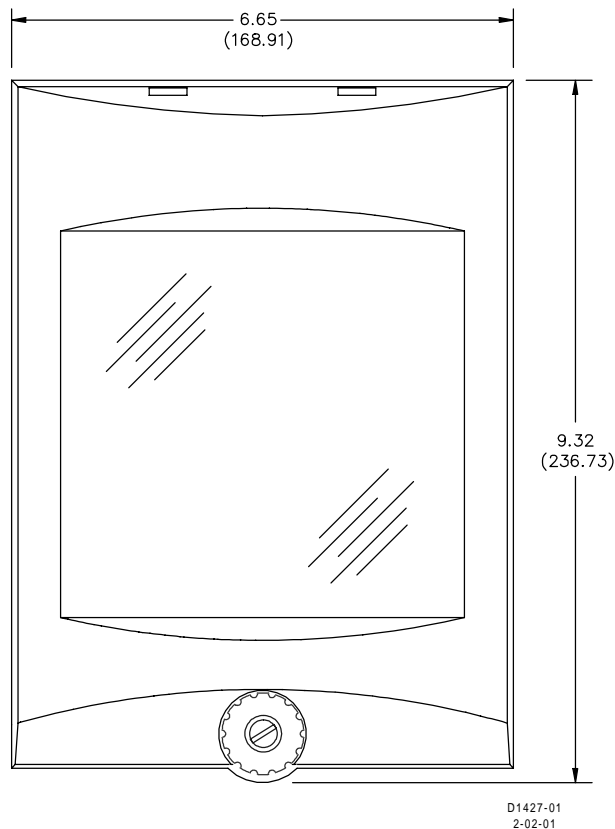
S1 Case, Outline Dimensions, Front View
